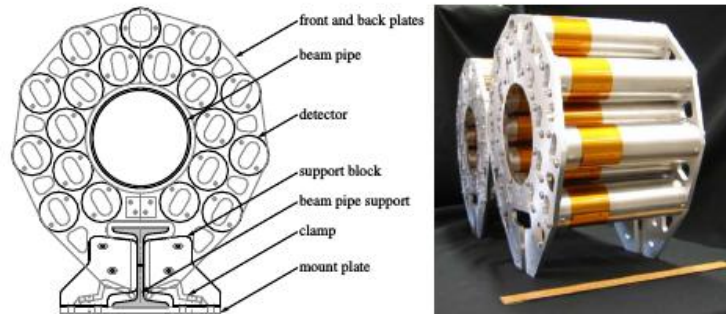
A schematic side of a VPD assembly (left) and a photograph of both VPD assemblies. Taken from Ref. [72].
